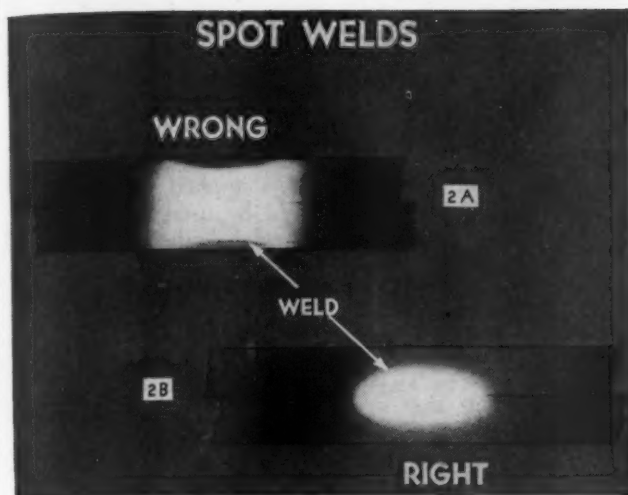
Fusion of metals in resistance welding should not extend to the surface of the pieces being joined
